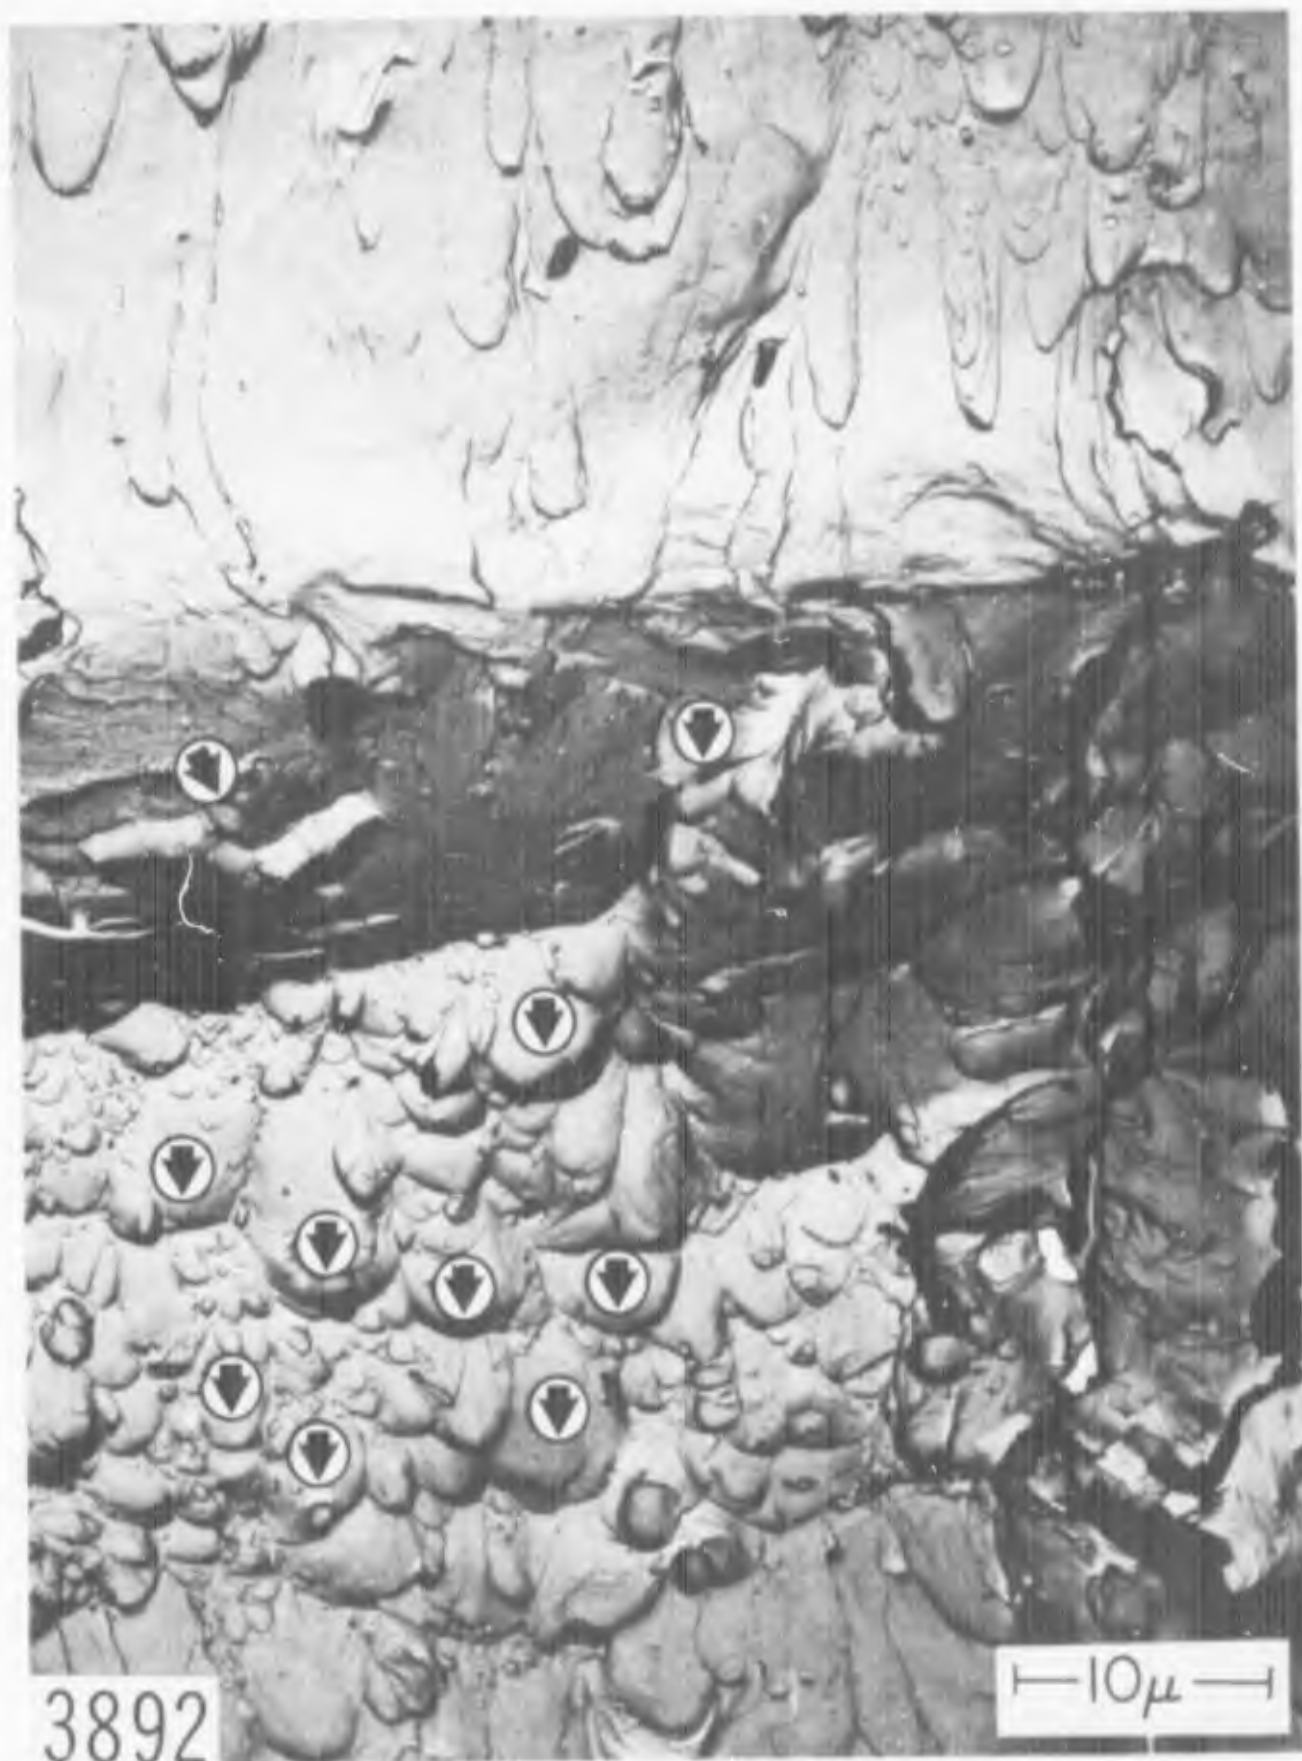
Fracture surface which matches that shown in Fig. 29. Same replicating conditions. 3500X.
